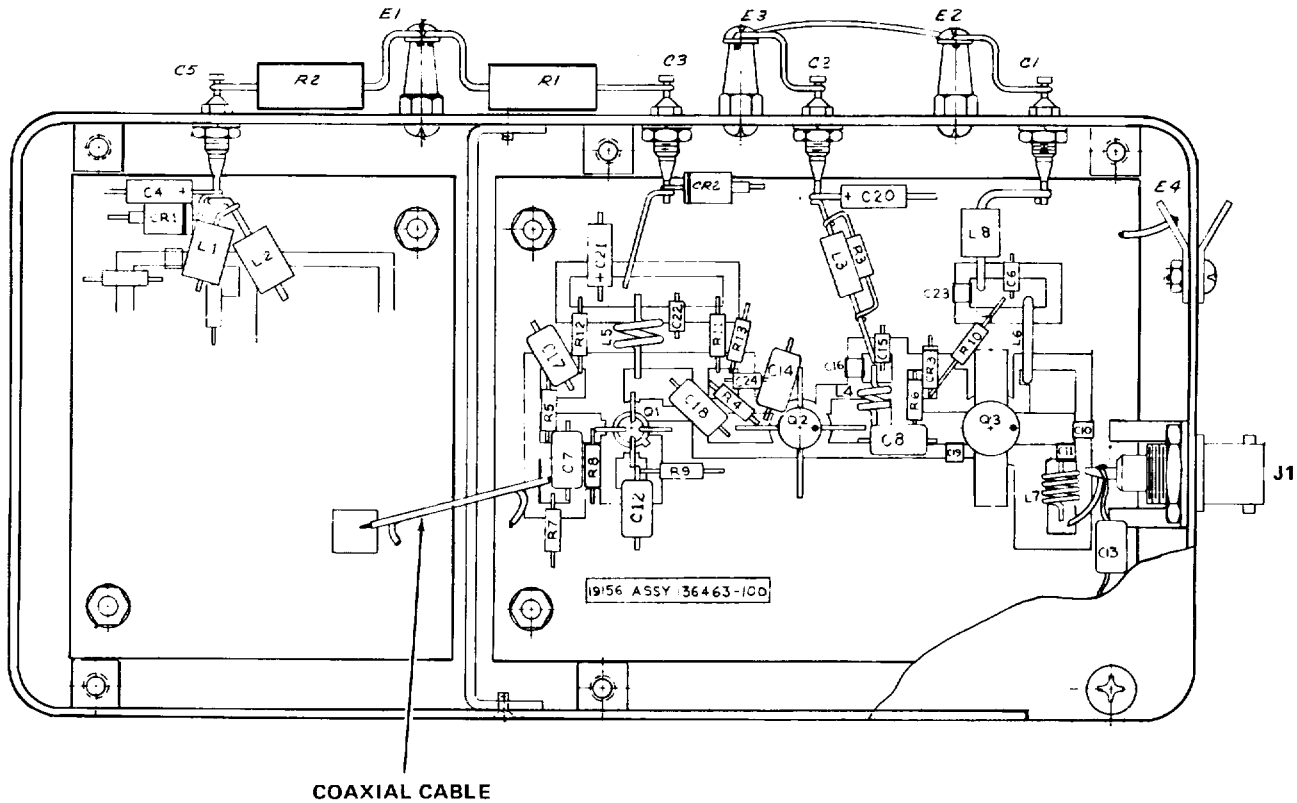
OSC/Exciter Assembly, 1A4A3 Parts Location Diagram
